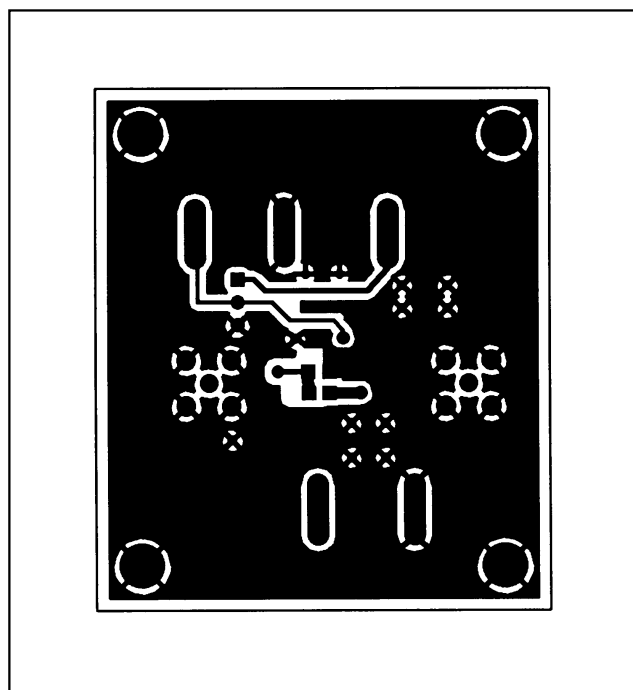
MAX4278 EV Kit Board Layout—Solder Side
